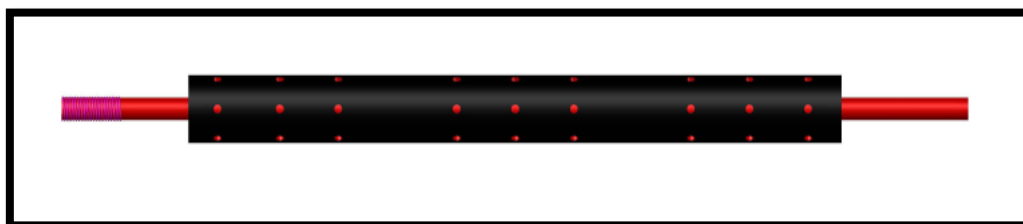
Design of vacuum metering cylinder with vacuum rod
